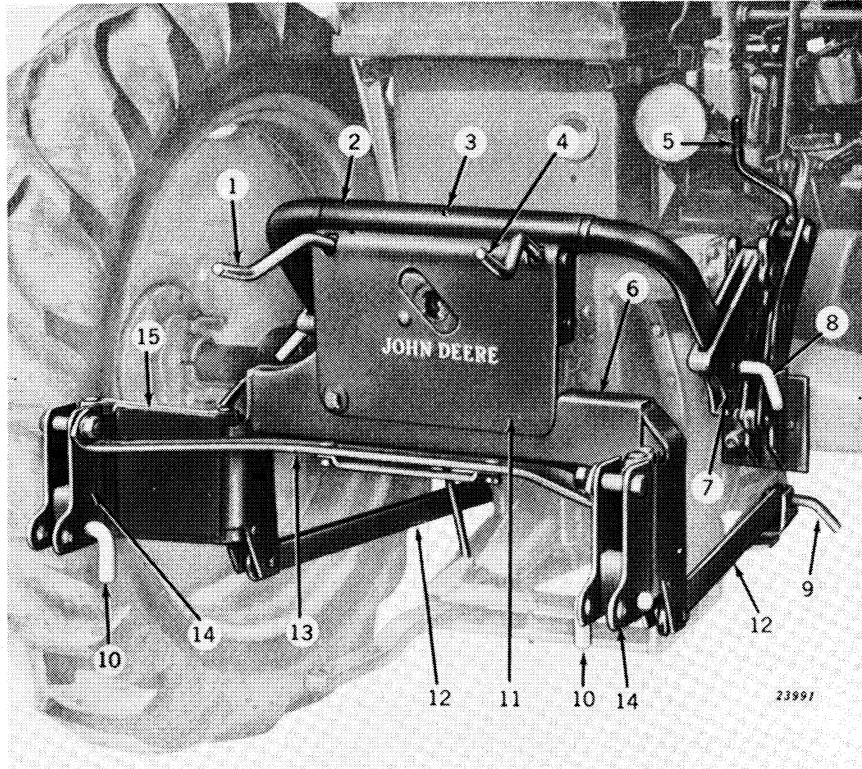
John Deere ABG-2000 Integral Tool Carrier
